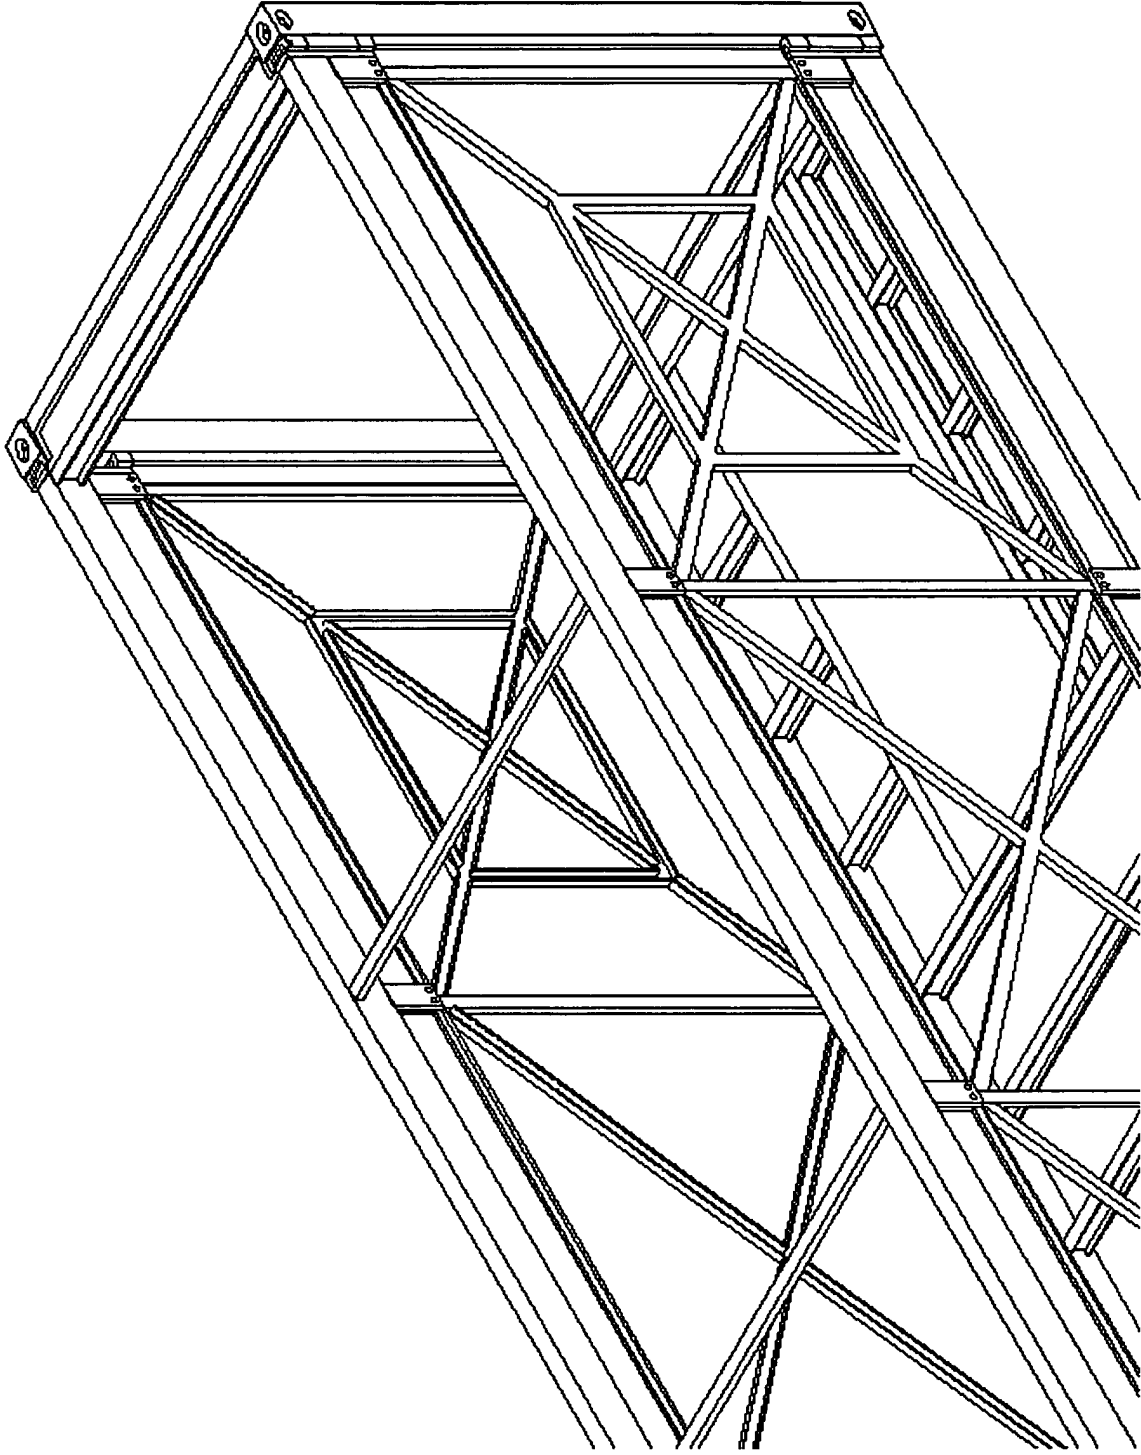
B: Enlarged isometric view of the left end of a 40 foot high cube collapsible cargo container frame
